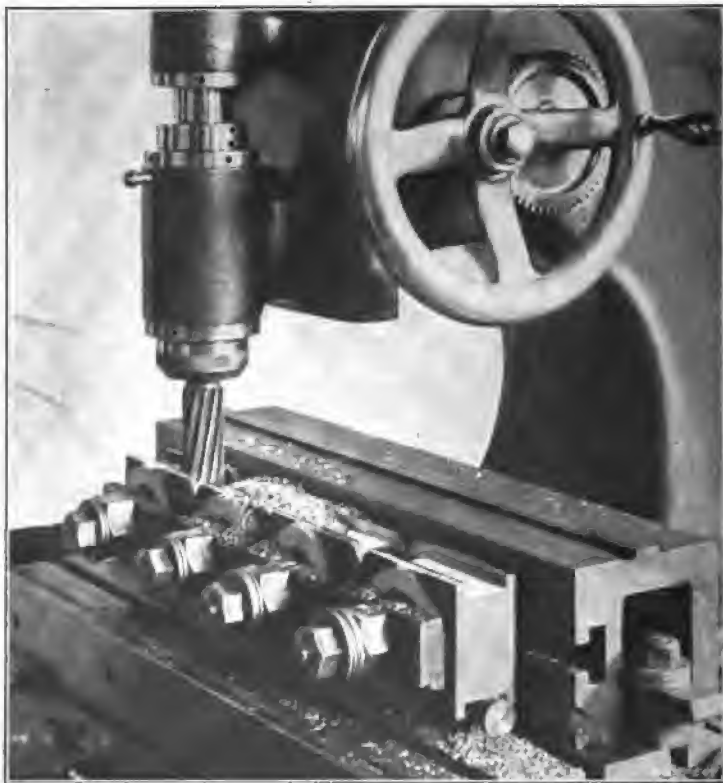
Milling Connecting-rod Bearing Brasses on Becker Vertical Machine
